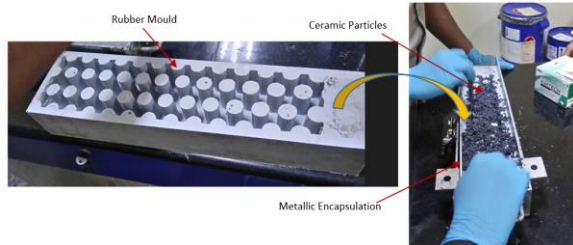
Silicon Rubber Mould for Fabricating Ceramic Pads
